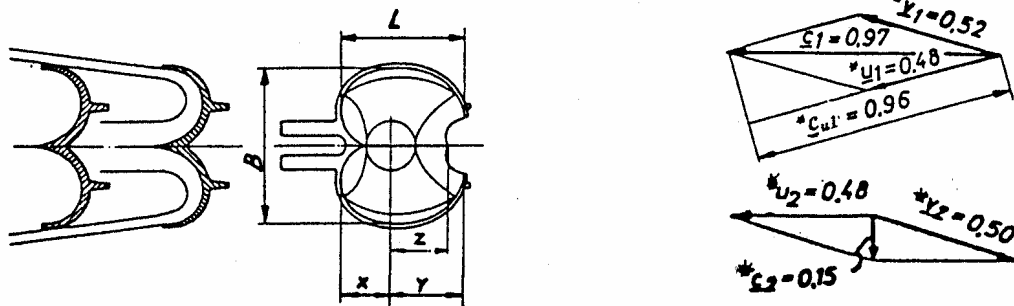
Pelton turbine, indication of main dimensions and the bucket form /5/
